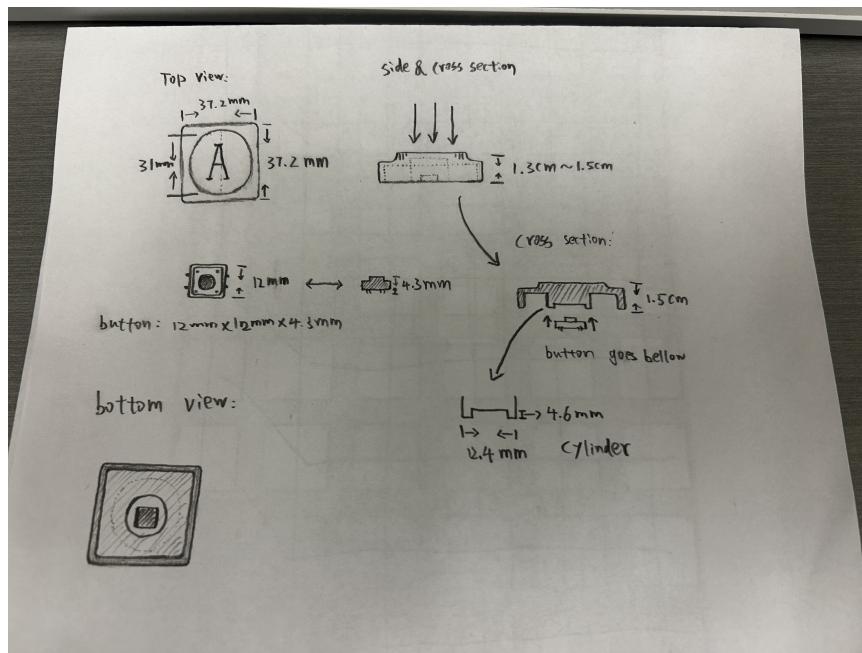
Hand-drawn keycap design sketch with dimensional specifications. Top view shows 37.2mm square keycap with circular indent matching the original King Keyboard aesthetic; cross-section details the button switch mounting geometry with the switch positioned below the keycap surface.
